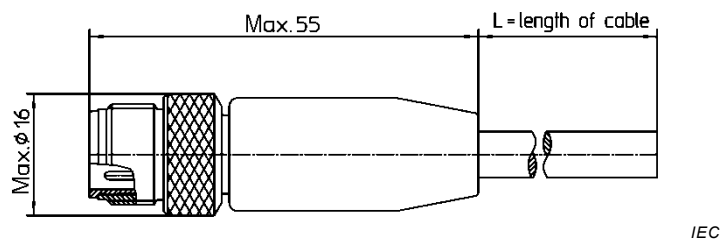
Non-rewireable connector, with male contacts, straight version, with locking nut
